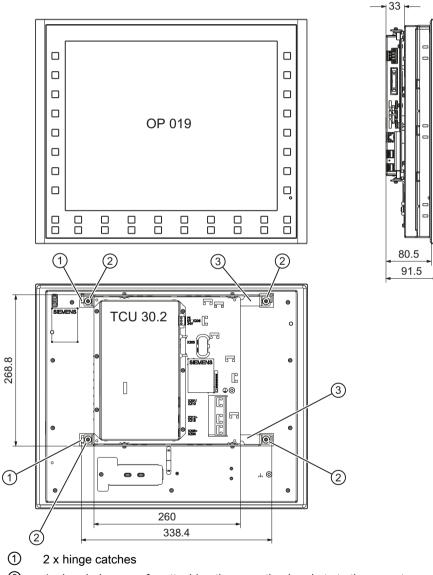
Mounted TCU (example with OP 012) in front, side and rear view
